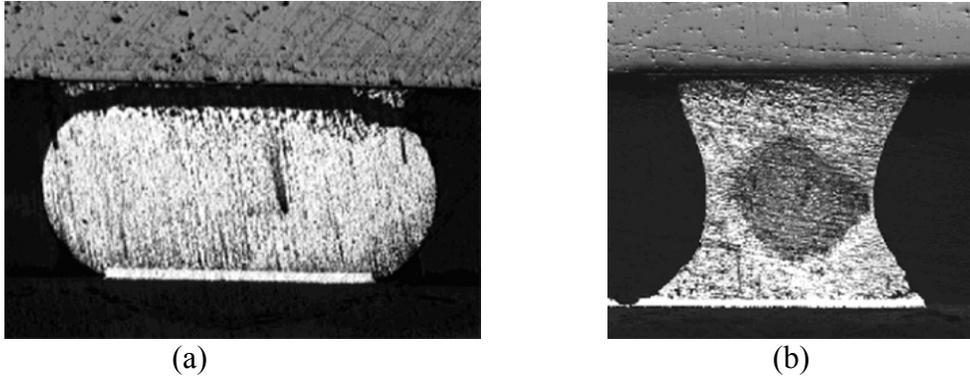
The solder bump failure after thermal cycling. (a) Barrel-shaped solder joints and (b) hourglass-shaped solder joints [63].
